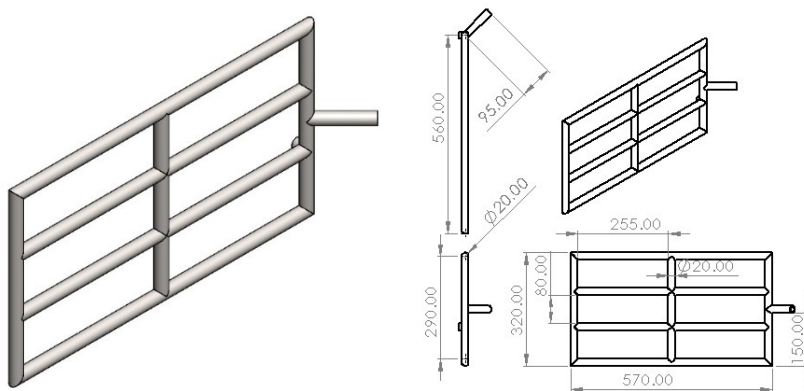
Entry Wood Carrier Side Tube Metals with their dimensions of Cylindrical Cook-Stove Model.
